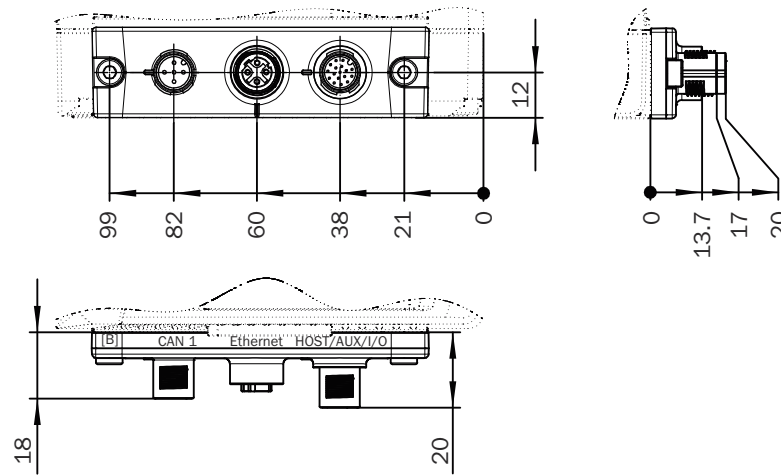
Dimensions of cloning plug B (M12), all dimensions in mm
